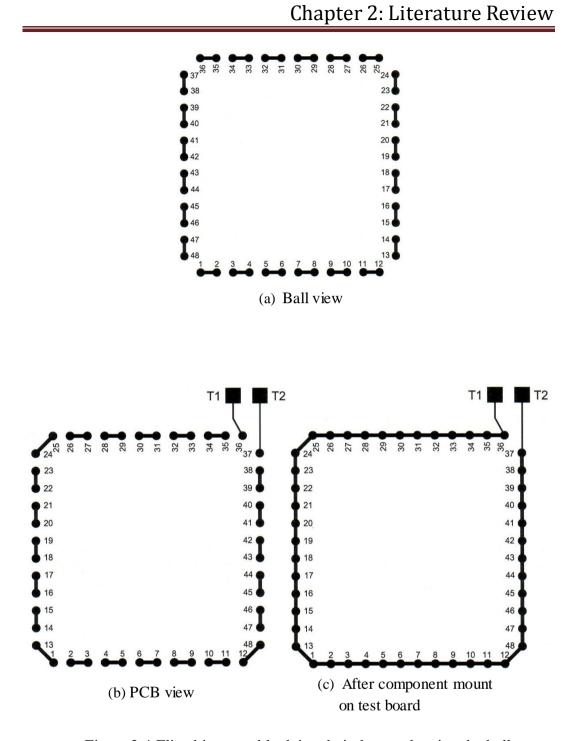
Flip chip assembly daisy chain layout showing the ball view , PCB view and the view after component mount on test board
